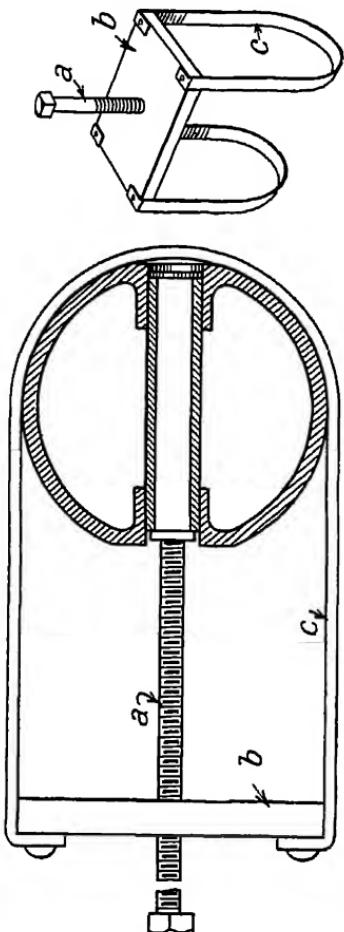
REMOVING GUDGEON PIN—ANOTHER METHOD
